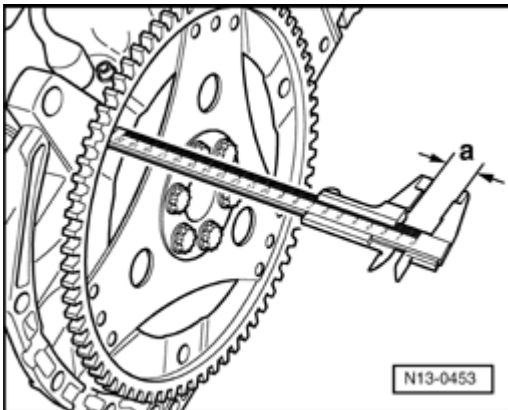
Checking Distance Between Drive Plate And Cylinder Block
